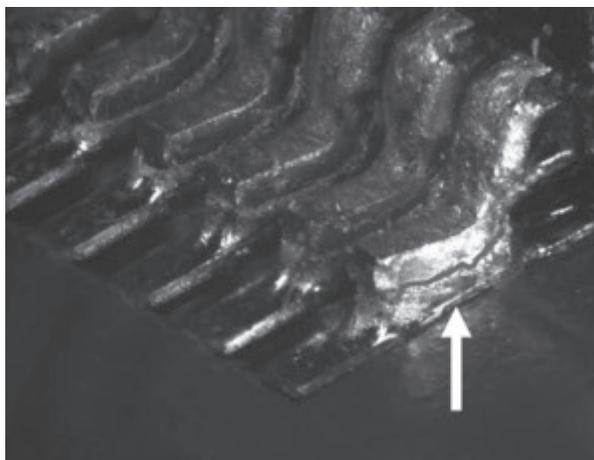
TSOP solder joint thermal fatigue failure
